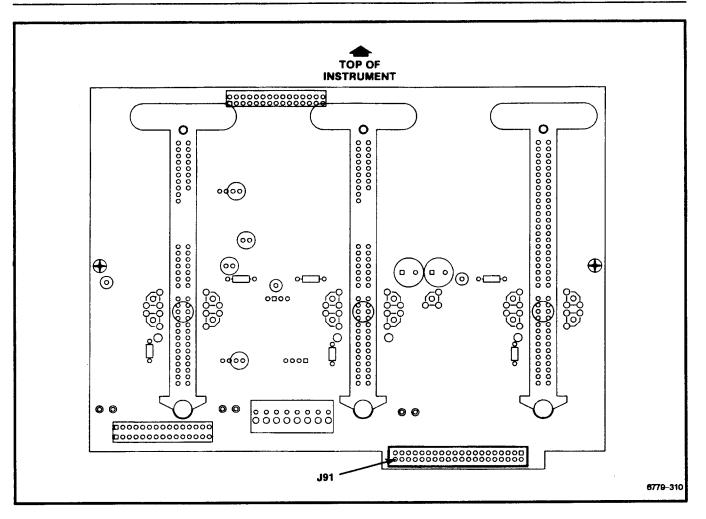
Connector location for removal of the A1 Plug-in interface board.
